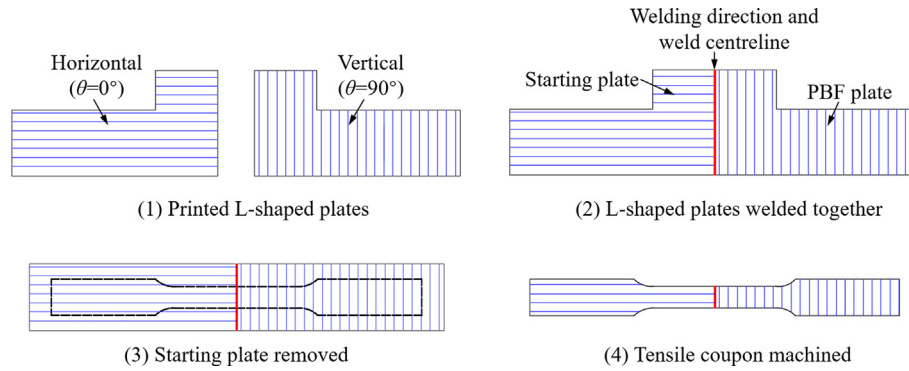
Laser welding and machining process for a combined X family tensile coupon.
